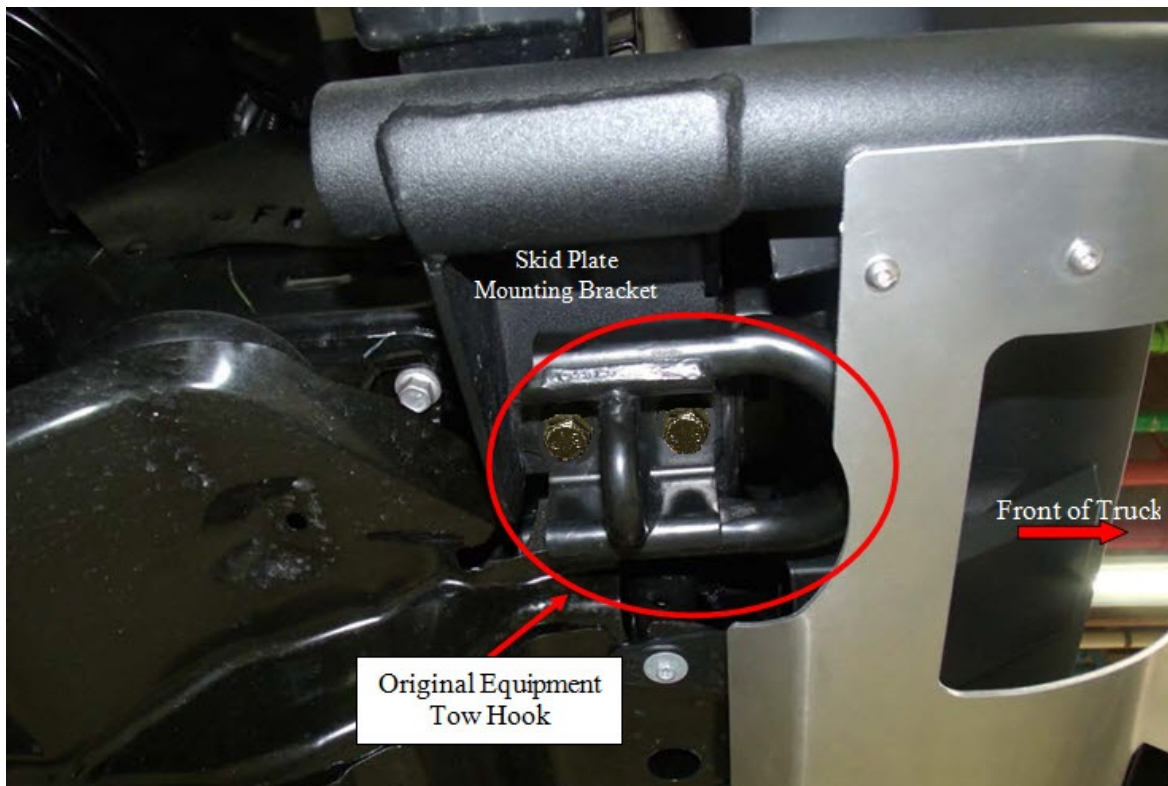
View of Passenger Side with Skid Plate and Tow Hook Installed
